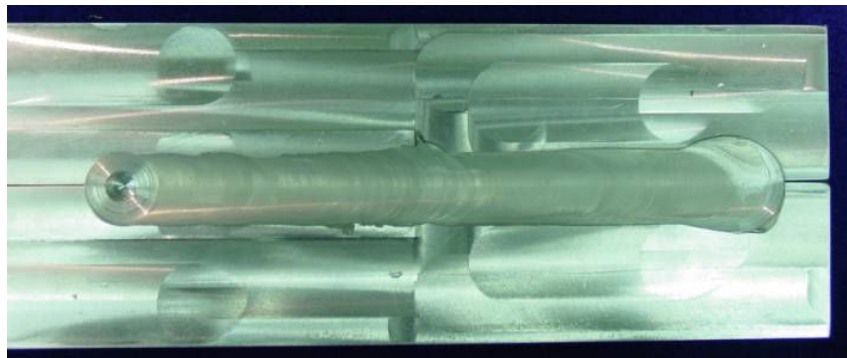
Weld sample with 1 millimeter step.
